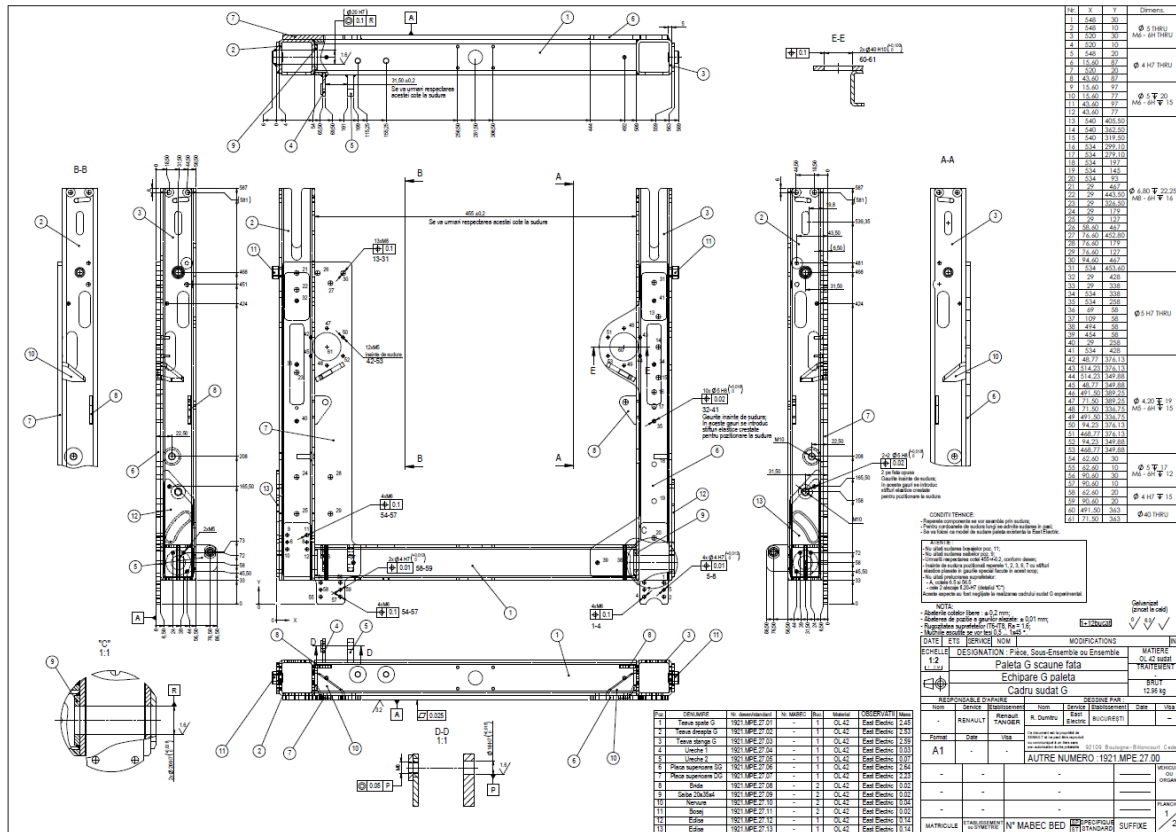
Manufacturing drawing of the SAV PALET G frame assembly ("Cadru sudat G").
